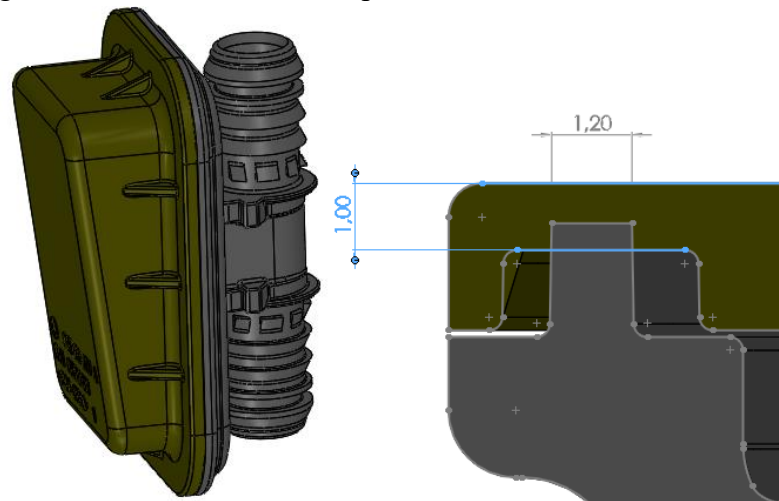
a) Resonator welded; b) Section of the welding joint, the upper component is laser transparent PA66 GF30, the lower component is laser absorbent PA66 GF30
